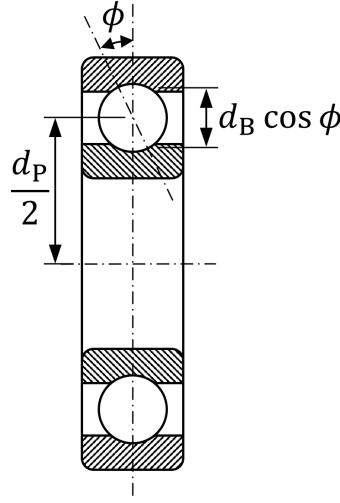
Cross-sectional view of a ball bearing; according to [38, p.169].
